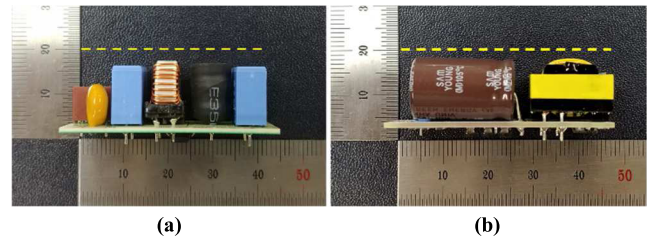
Side view of (a) the AC driving part prototype, (b) the DC driving part prototype.
